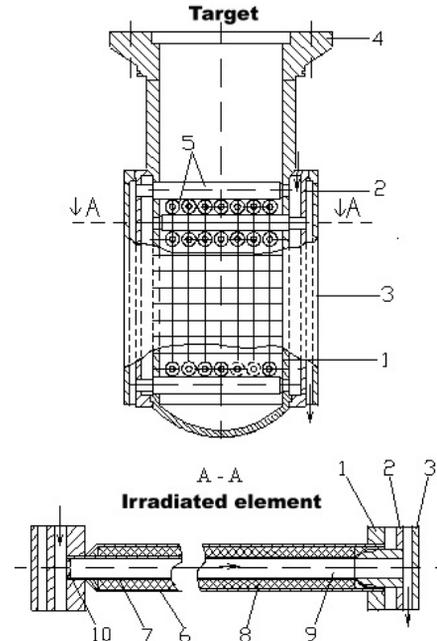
Target. 1, 2, 3 – vessel with channels for coolant; 4 – vacuum ion guide; 5 - irradiated elements; 6, 7 – shells of irradiated element; 8 - fissile material; 9 - coolant channel; 10 – throttle.
